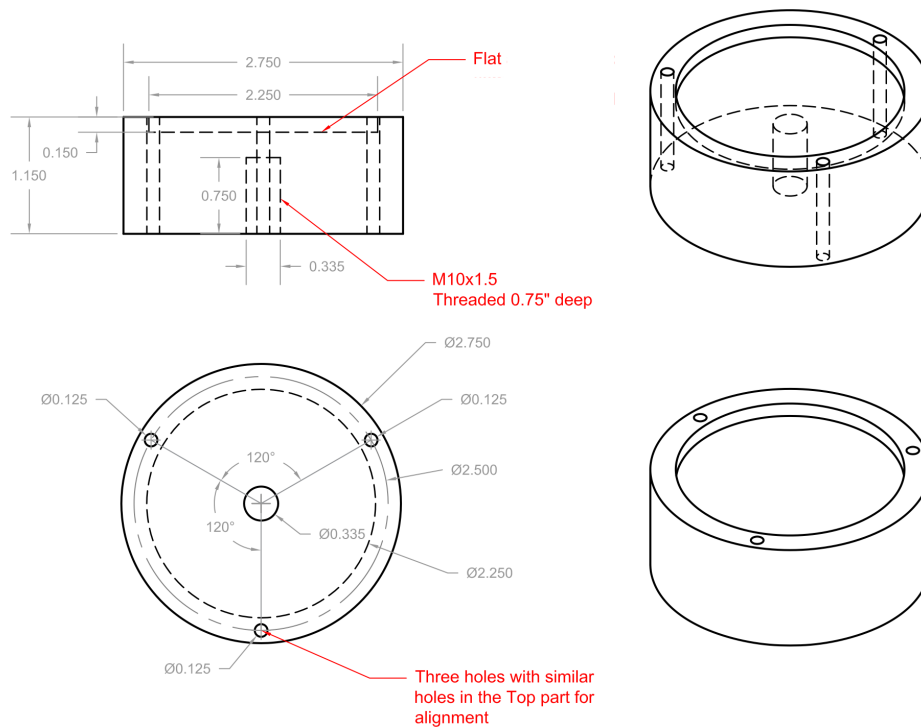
Stainless-Steel Mold. Bottom piece of the poker-chip mold (all dimensions in inches).
